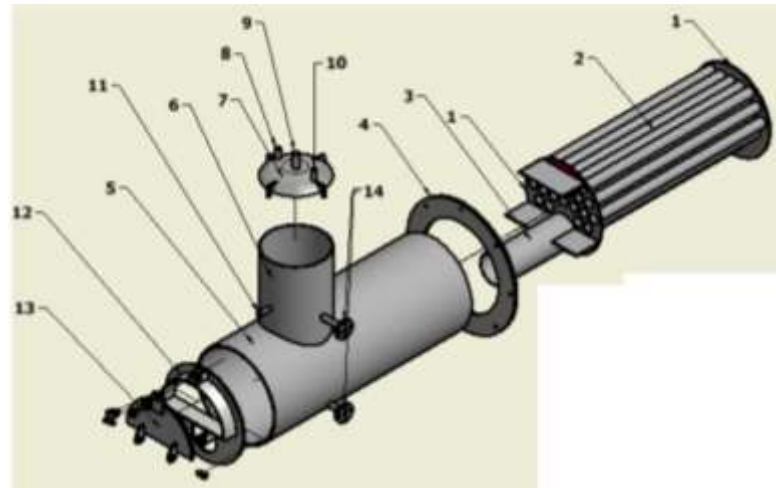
Mini boiler body: (1) tube sheet, (2) Fire pipe, (3) furnace, (4) flank, (5) water tank, (6) steam tank, (7) steam tank cover, (8) socket safety valve, (9) socket output, (10) socket pressure gauge, (11) socket thermometer, (12) tube window, (13) window, (14) flank water level
